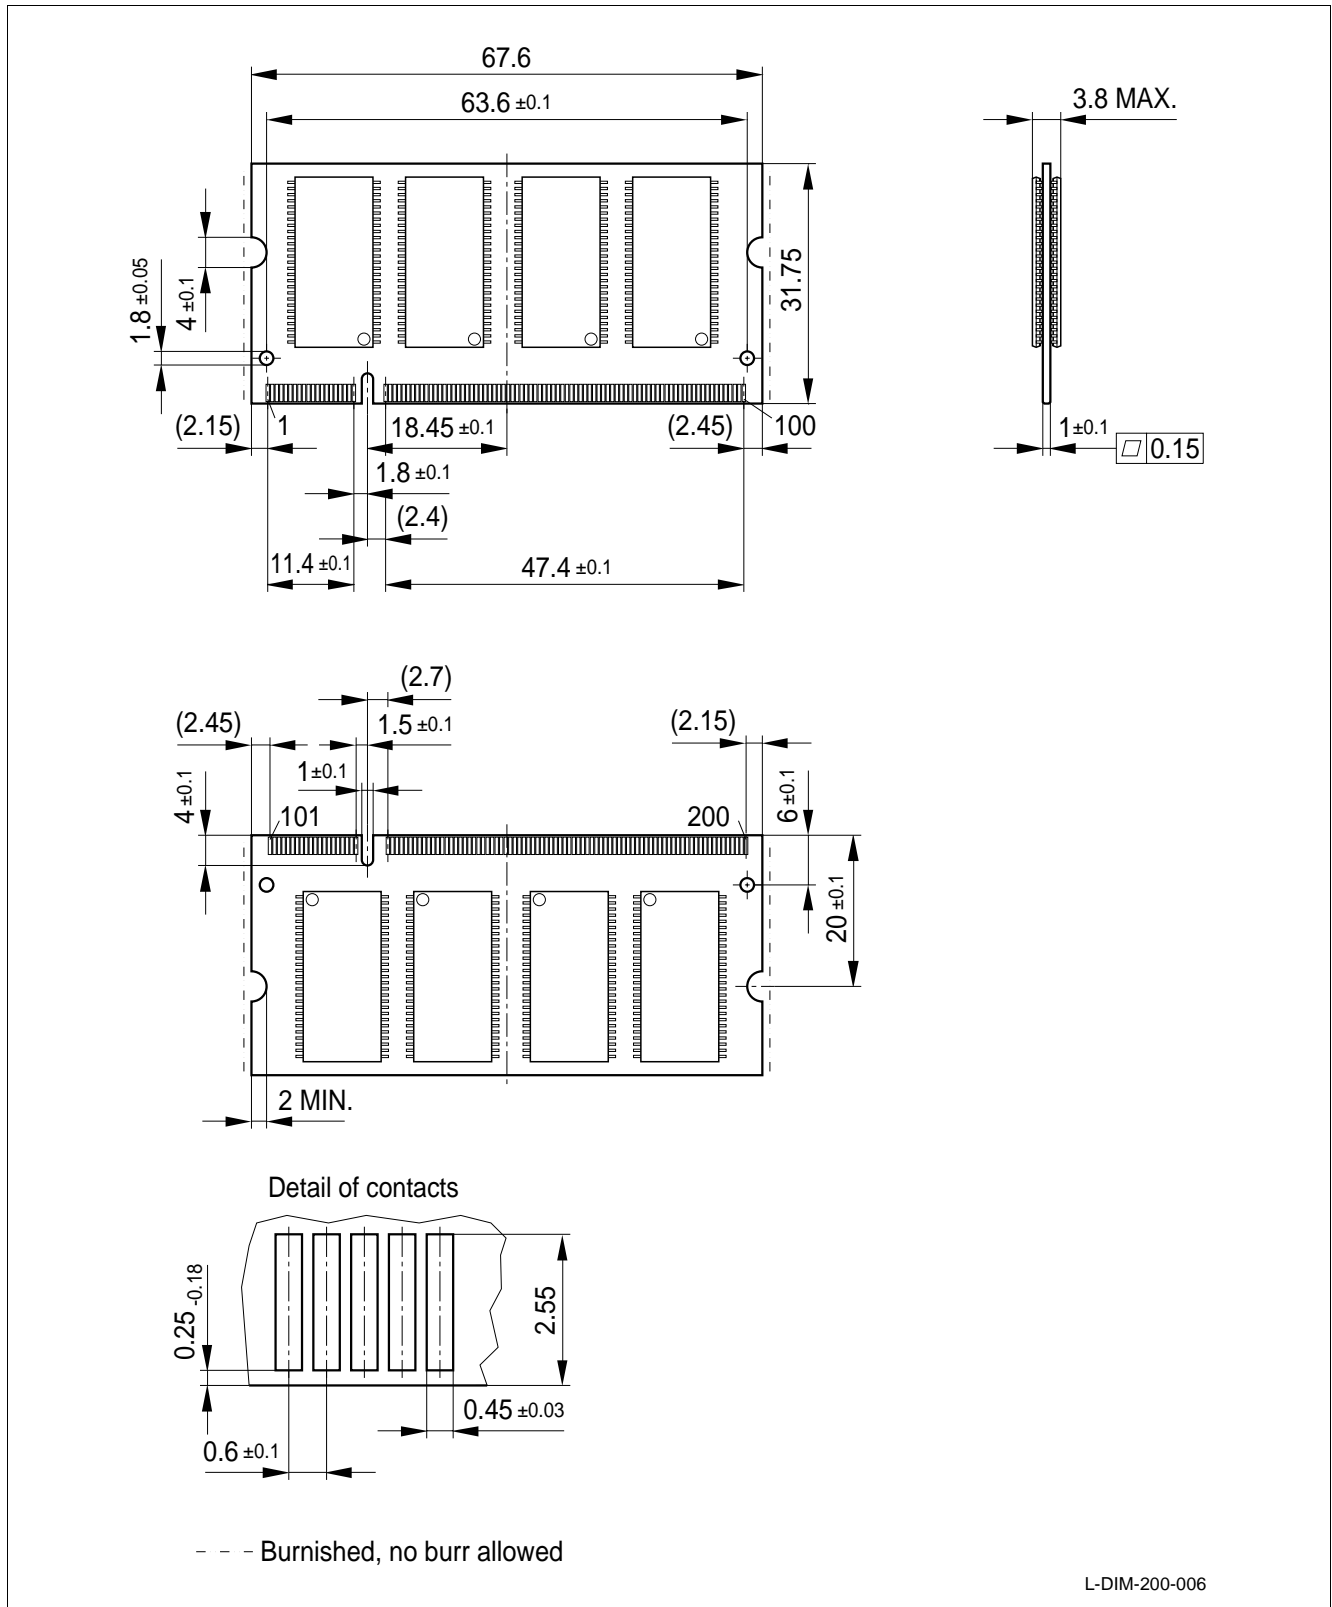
Package Outlines – Raw Card A DDR-SDRAM SO-DIMM Module HYS64D32020GDL-[5/6/7/8]-B
